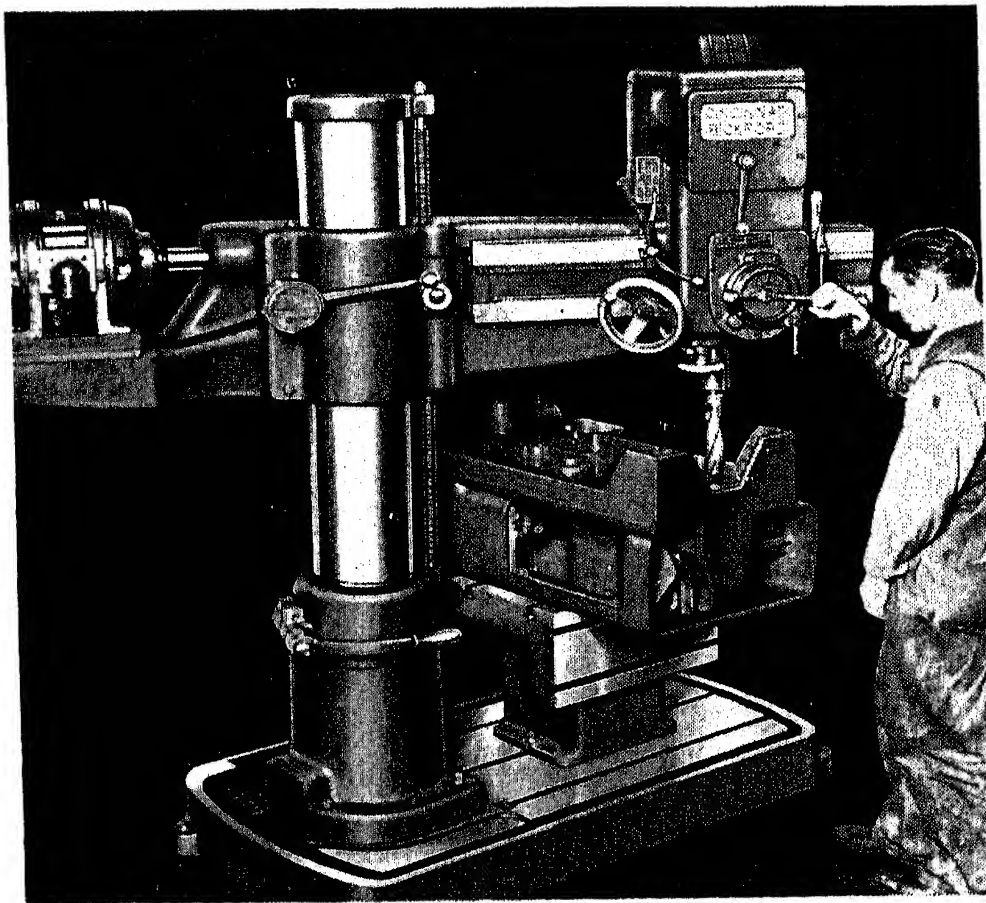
A 4 ft radial drill. (Courtesy Cincinnati Bickford Tool Co.)
